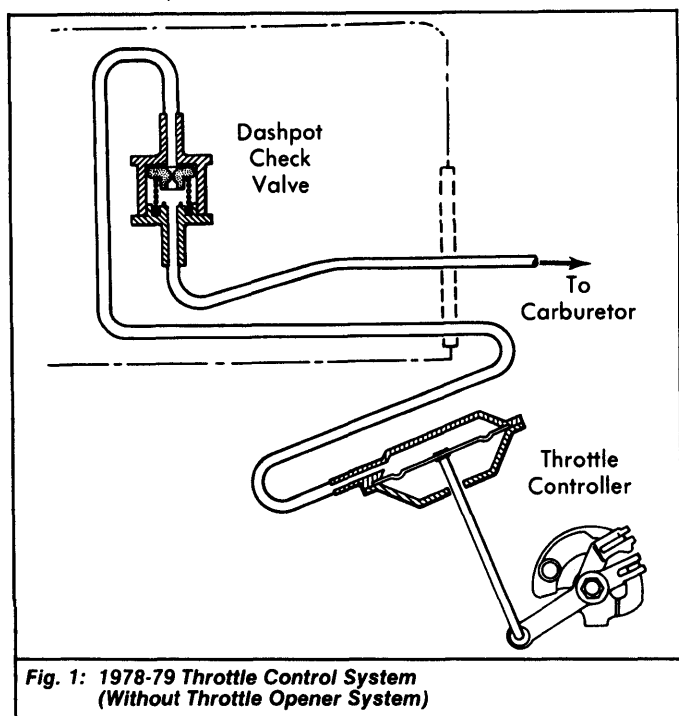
1978-79 Throttle Control System (Without Throttle Opener System)
